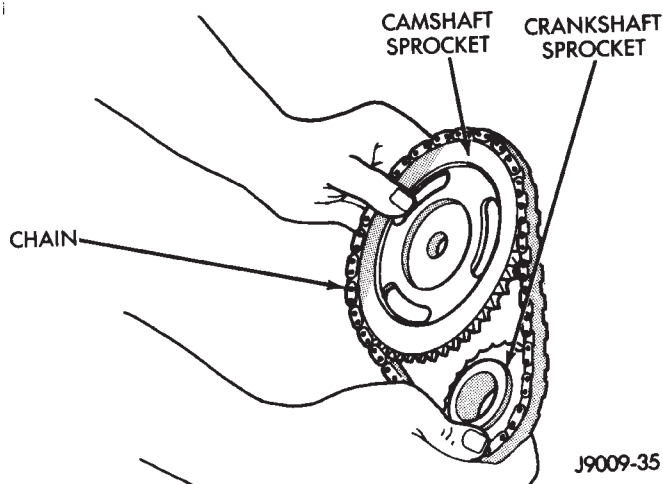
Camshaft and Crankshaft Sprocket and Chain
